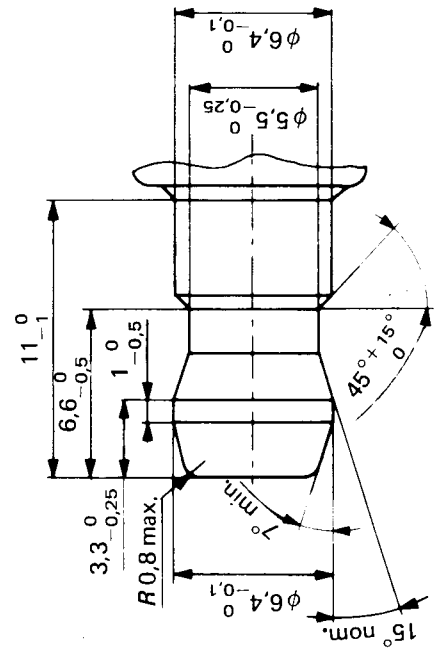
Solid post terminal (Detail A of Figure 1)
